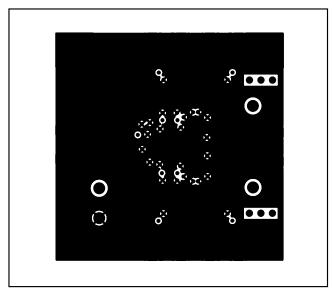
MAX2023 EV Kit PCB Layout—Bottom Layer (Metal)
